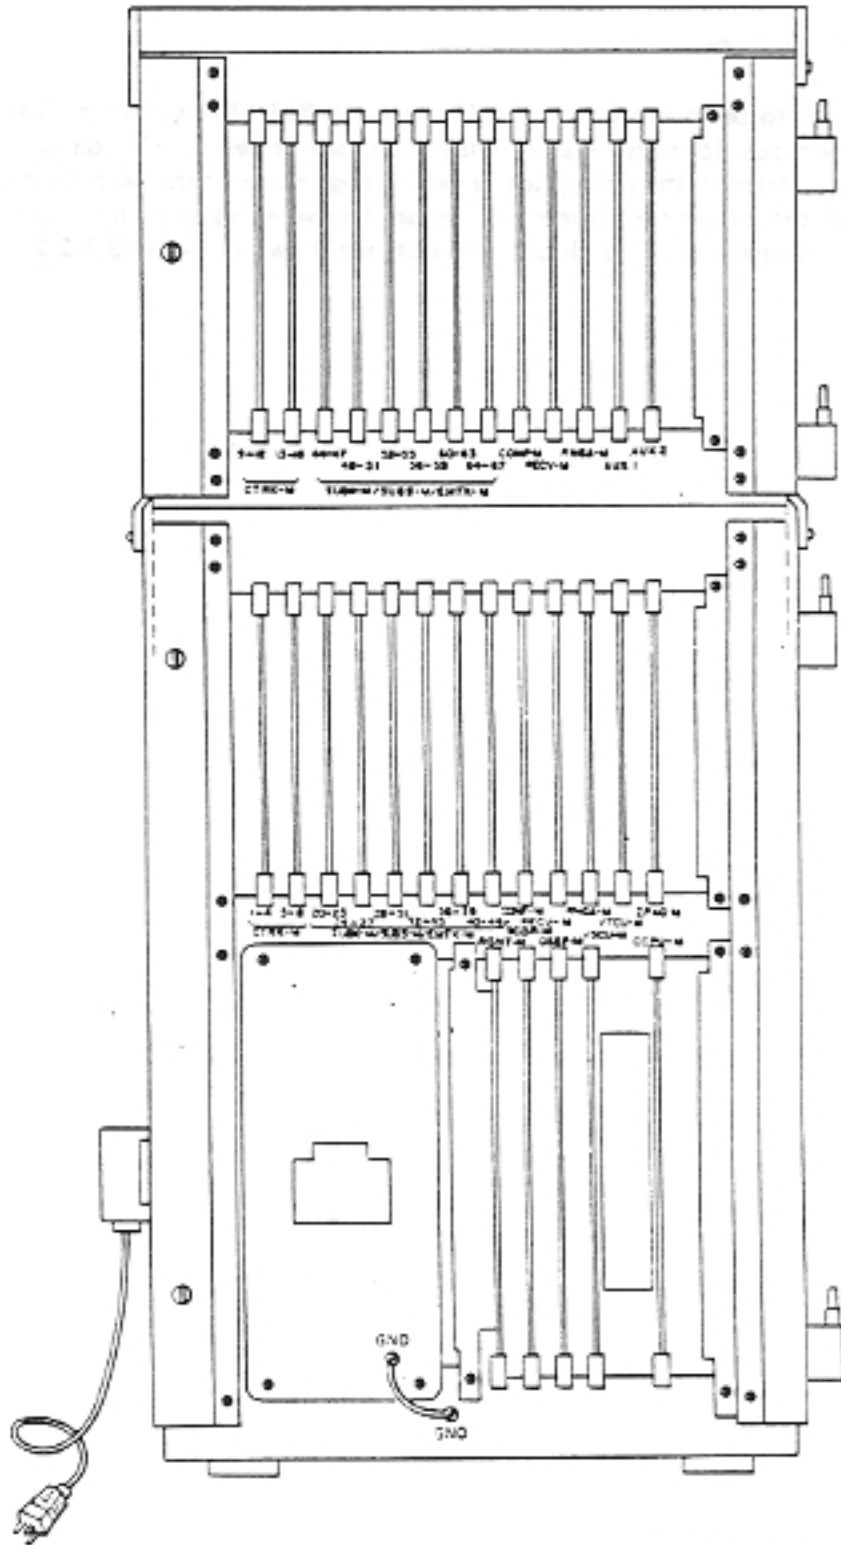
(1) Printed-Circuit Board Mounting
